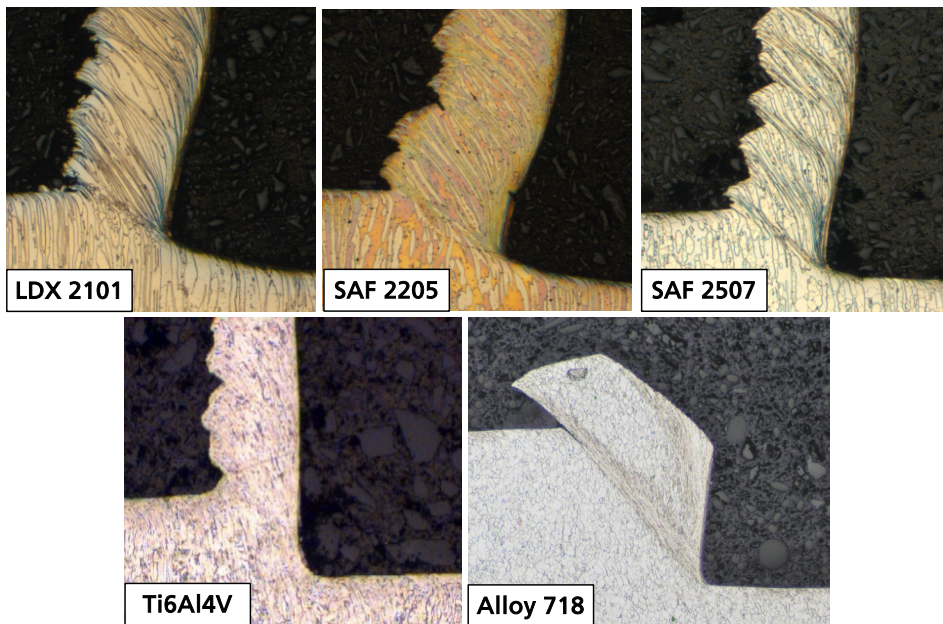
Examples of chip formation in selected materials obtained through using a so called quick-stop equipment, modified from [97].
